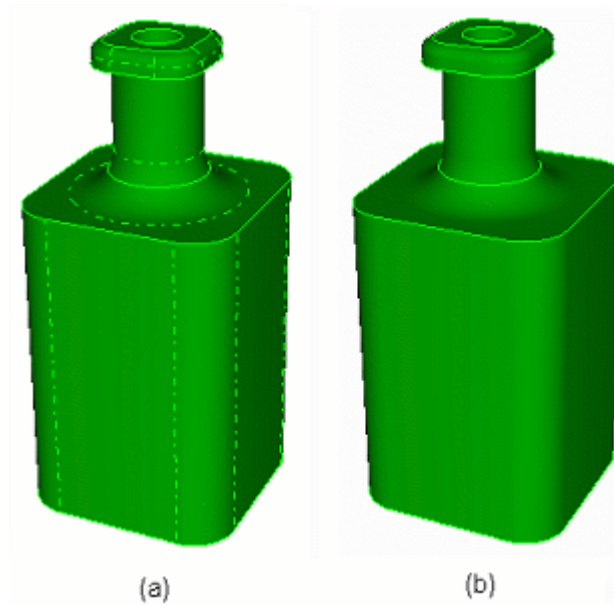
A part shown with (a) composite surfaces displayed (b) composite surfaces not displayed
